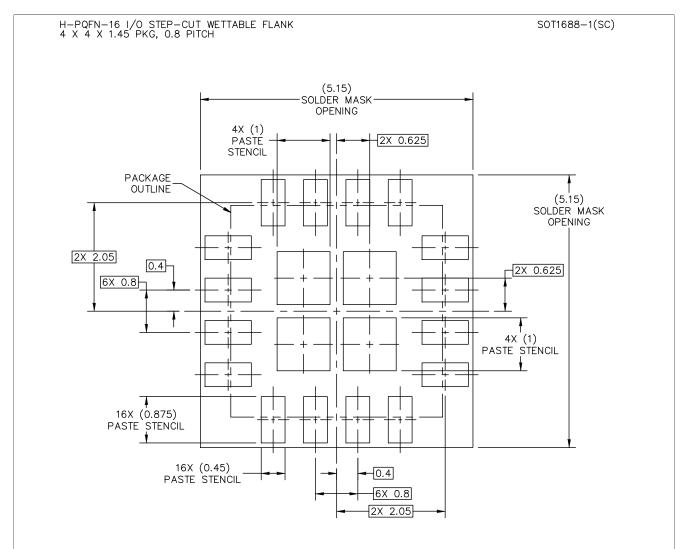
Reflow soldering footprint part4 for HLQFN16 (SOT1688-1(SC))
